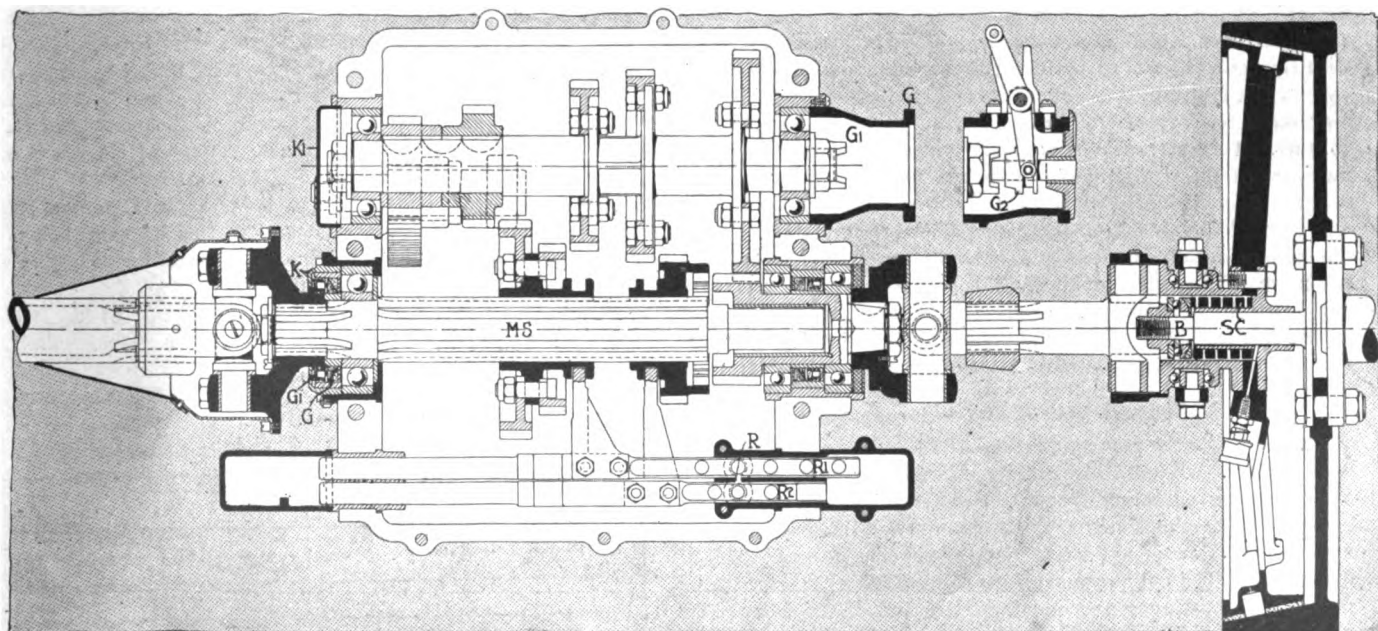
Sectional view of the four-speed gearset and cone clutch. Attention is called to the arrangement which prevents simultaneous meshing of different gear trains
